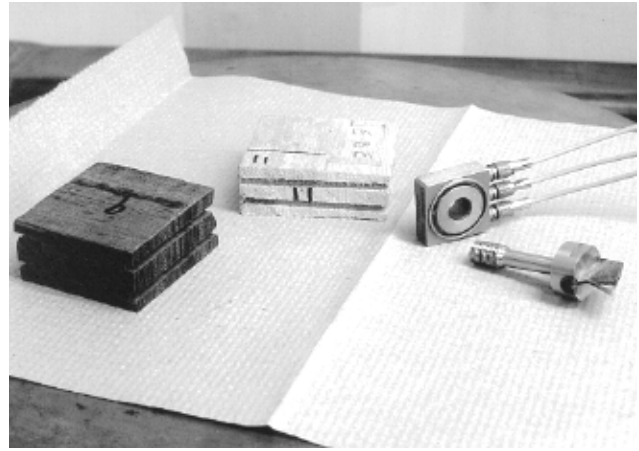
Sawtooth mounted on threaded post; wood blocks showing cutting track.
